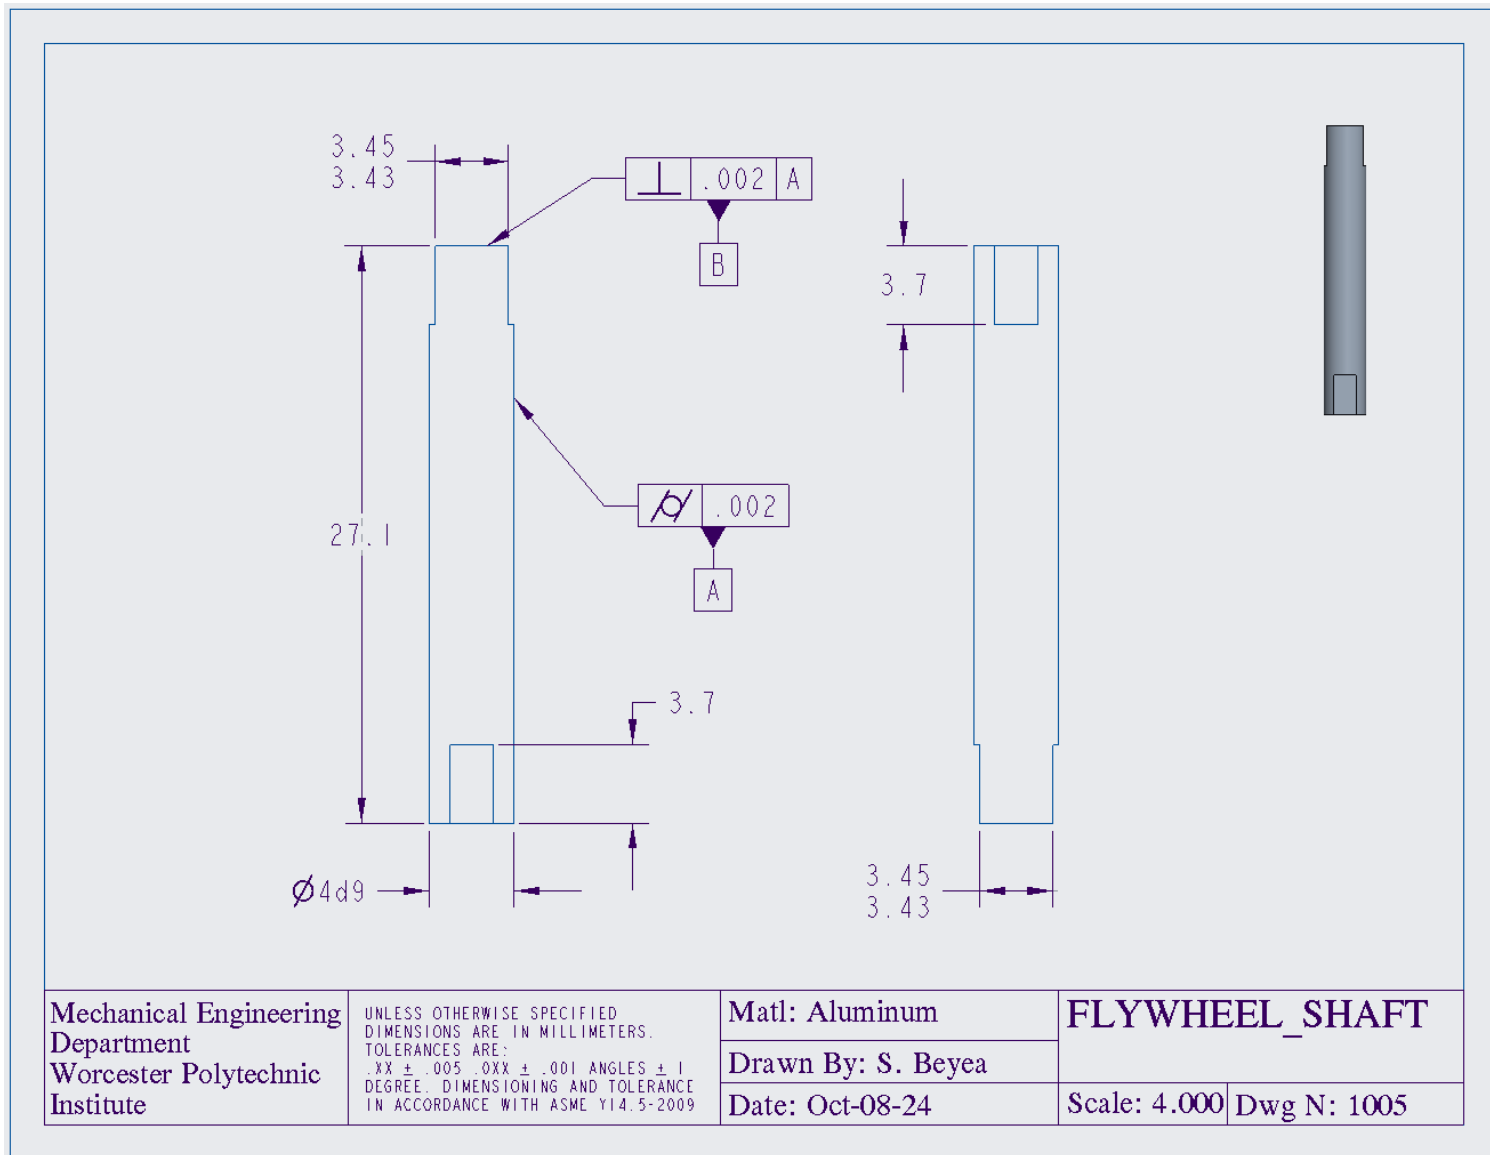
flywheel shaft which the bis and small flywheels mount to.
